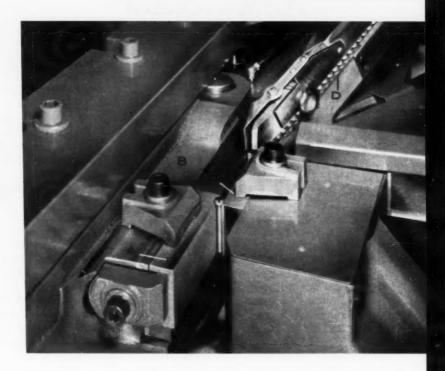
Threading a roundhead machine screw on a reciprocating thread-rolling machine. The blanks are delivered to moving die (A) and stationary die (C) from feed chute (D).
